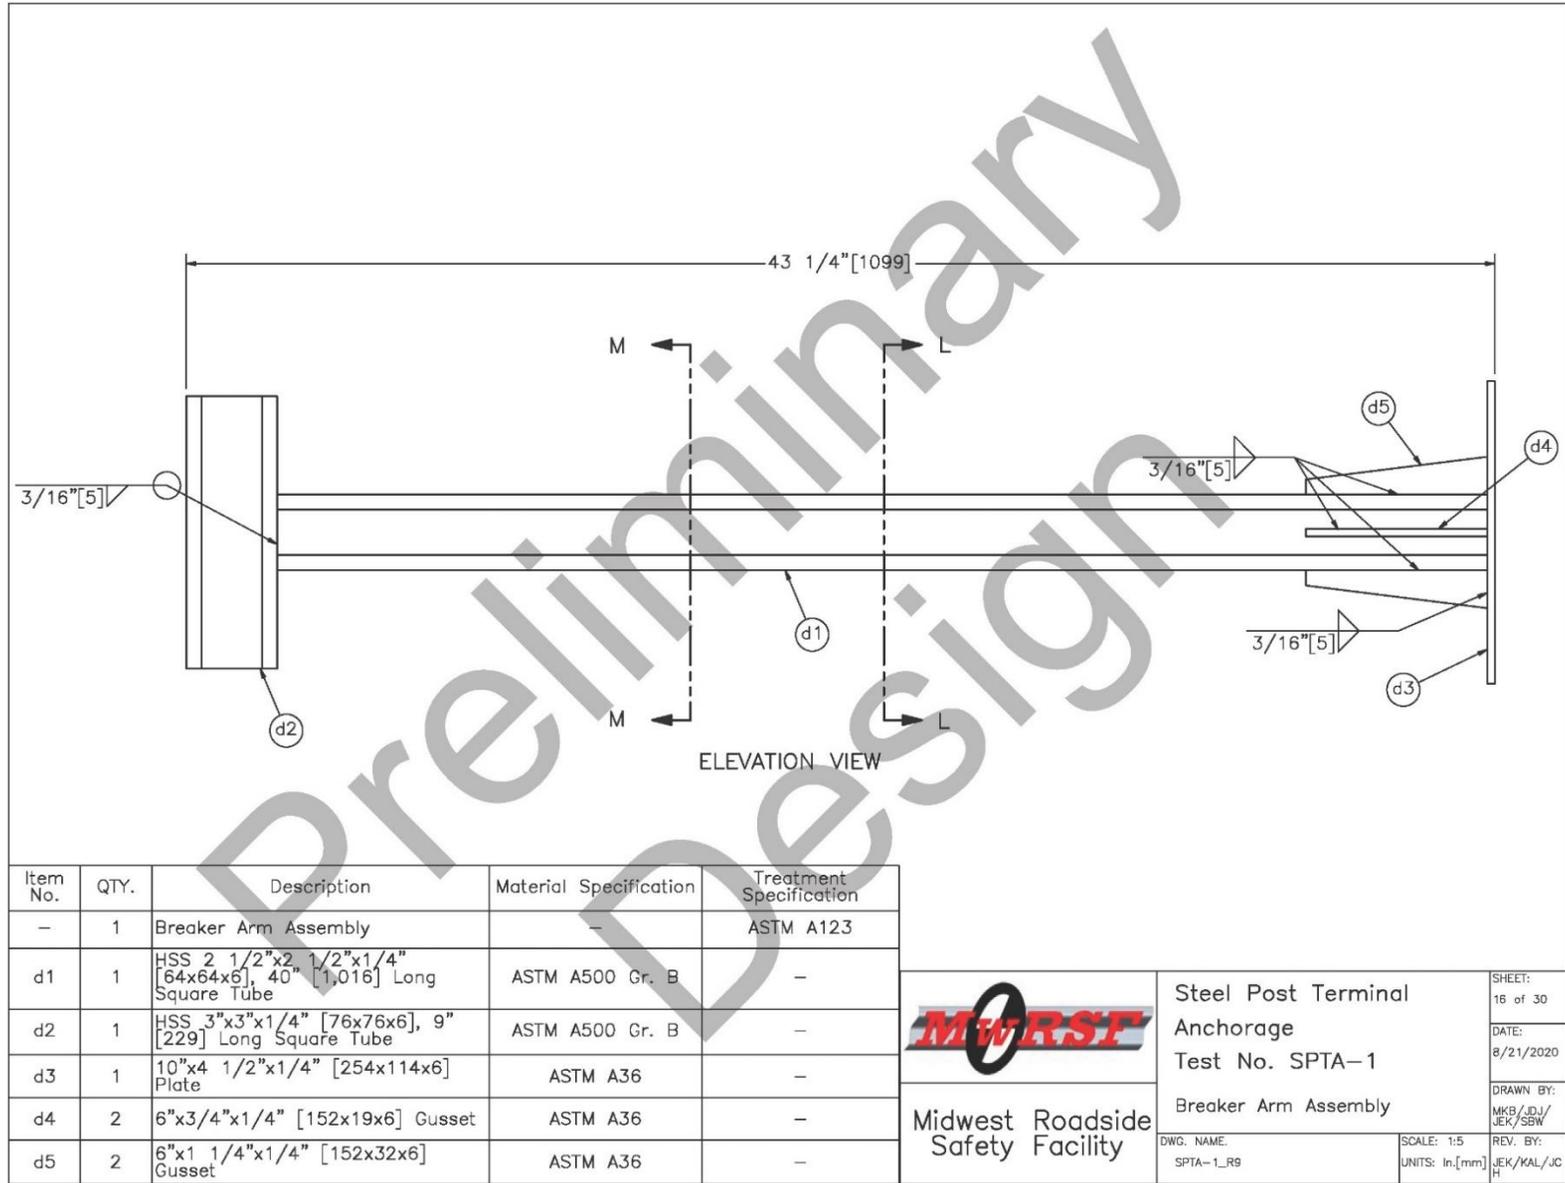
Breaker Arm Assembly, Test No. SPTA-1
